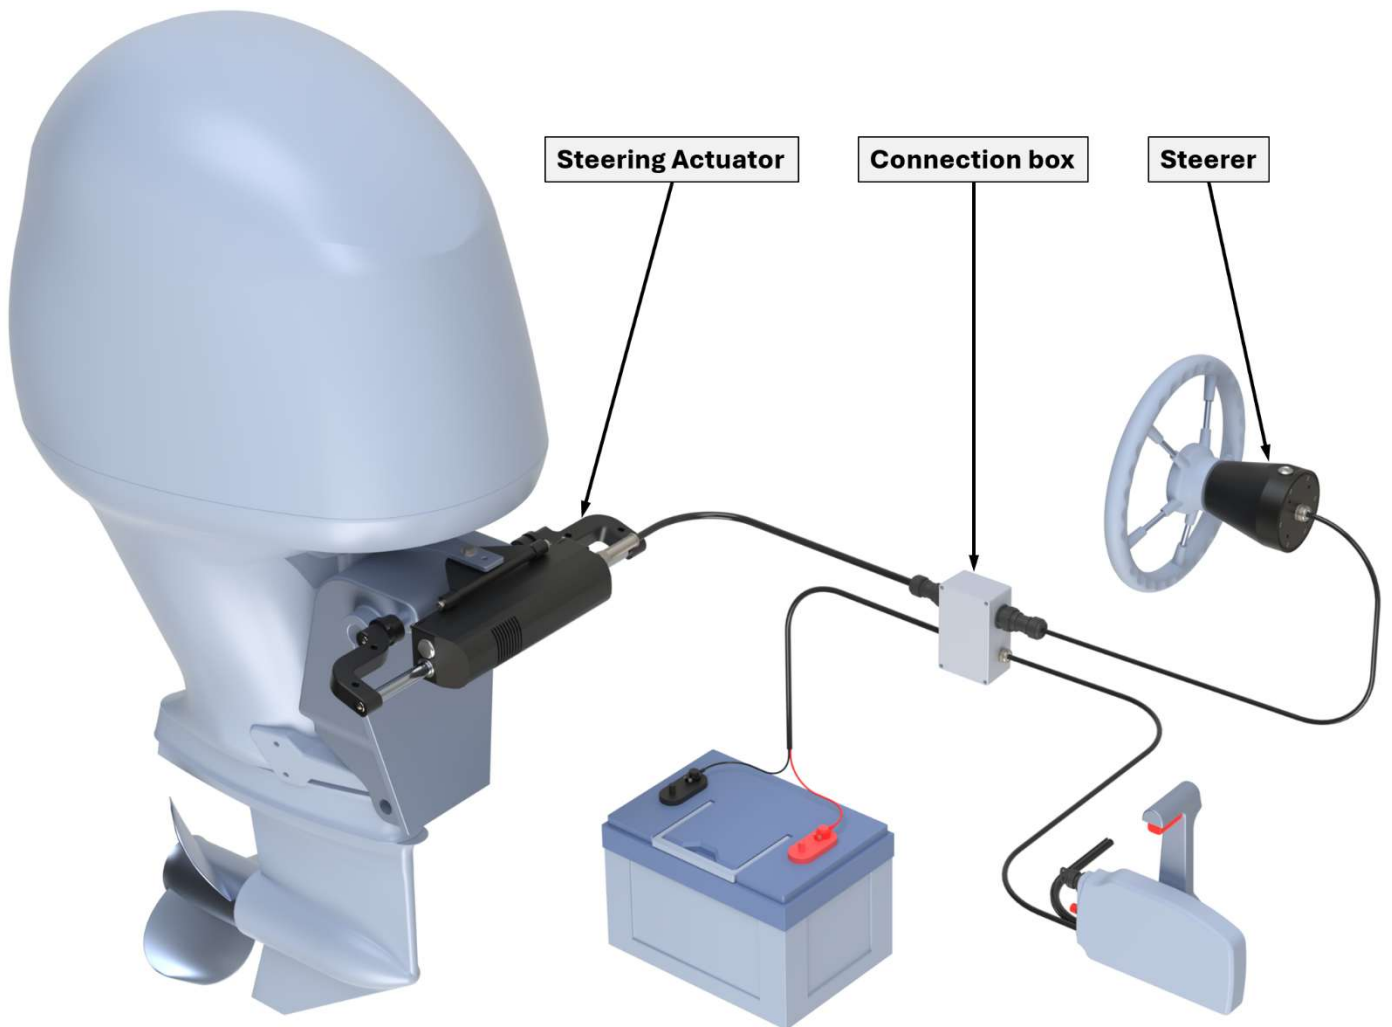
Installation of electric steering system, with connections to outboard motor, battery and to kill switch in motor controller.
